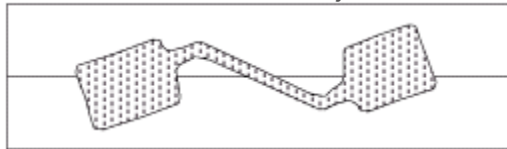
The forging can be rotated in the die to balance the lateral loads and eliminate the counterlock. However, the holes in the bosses cannot be forged, and must be fully machined.
